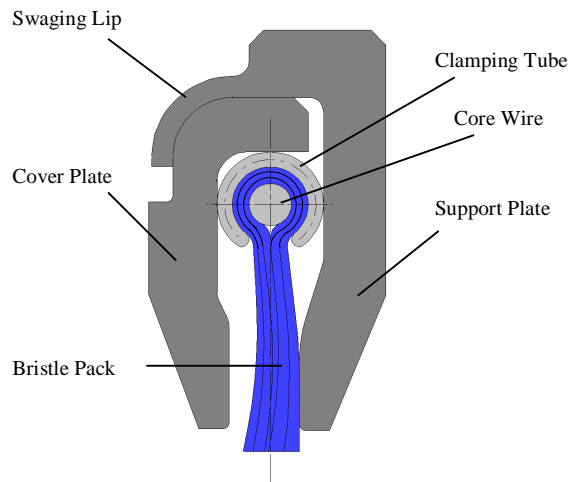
Cross section of MTU Brush Seal with machined side plates
